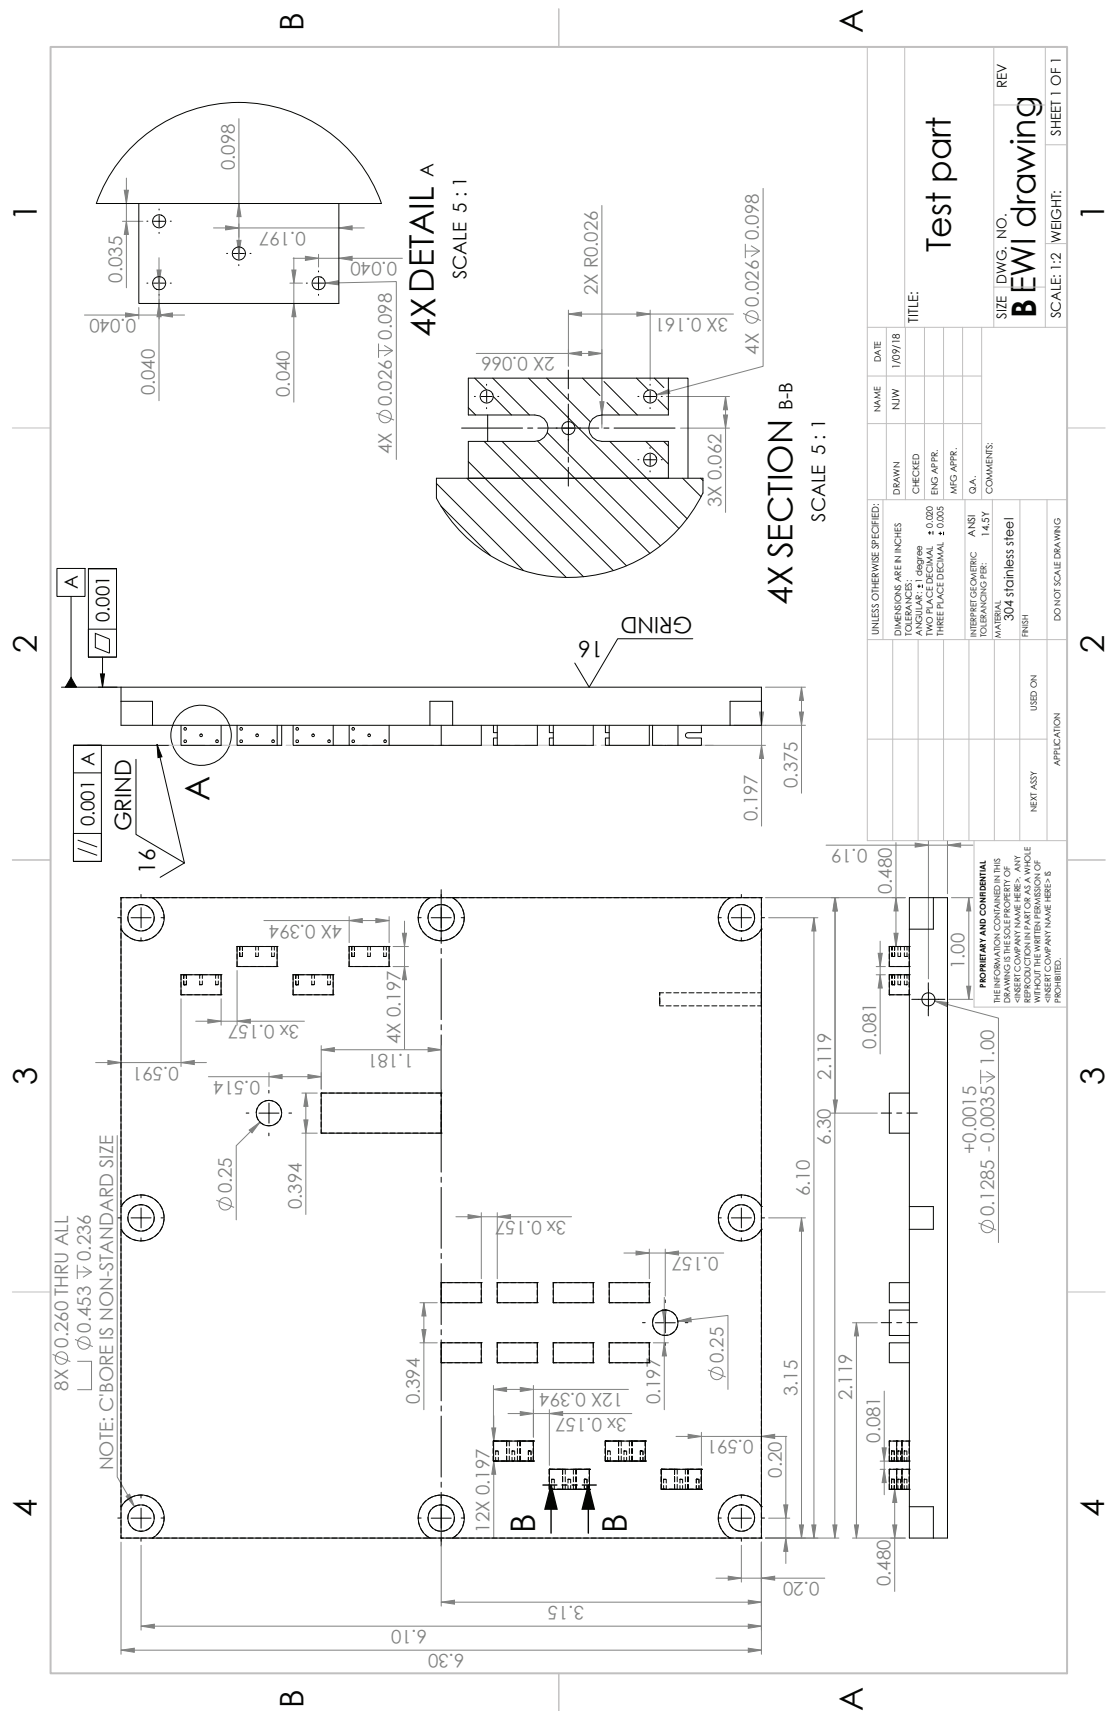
Engineering drawing of test part with all nominal dimensions labeled.
